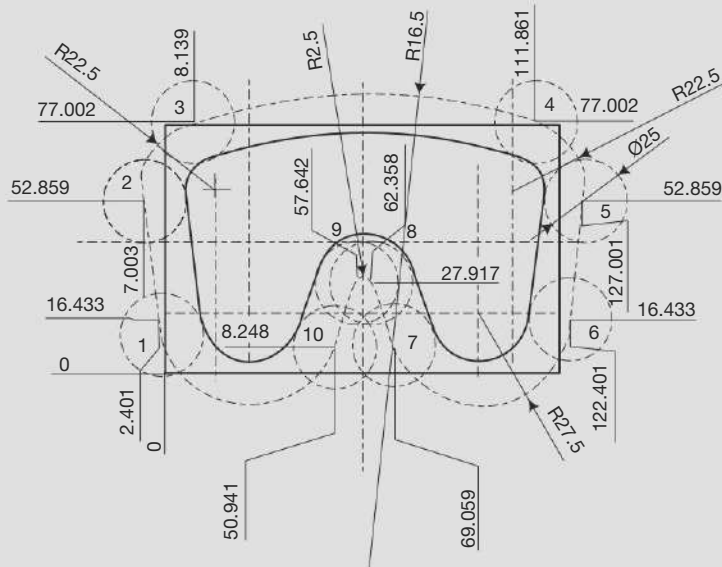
Part drawing shown with cutter for Example 13.14
